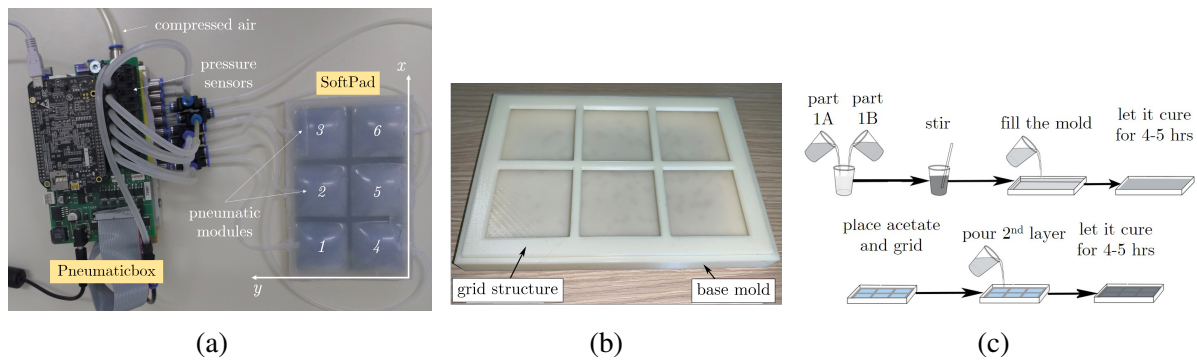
(a) SoftPad and Pneumaticbox used in the experiments. (b) 3D printed mold and grid structure for building the SoftPad. (c) Complete process flow to develop a SoftPad.
